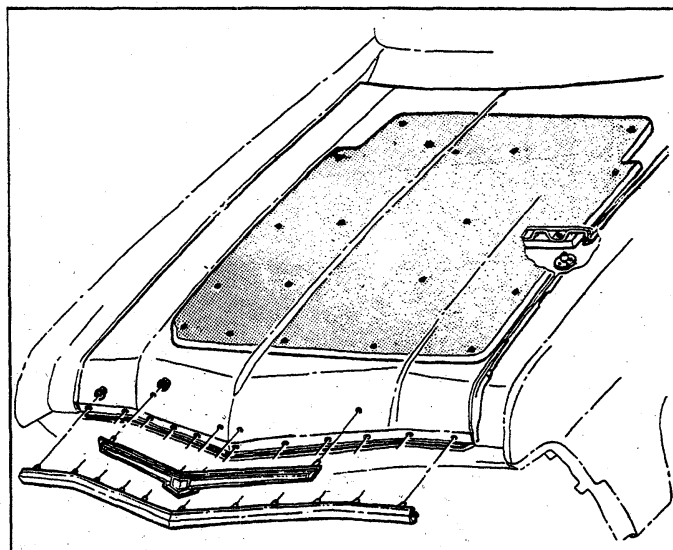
Hood, Insulator, and Molding - Chevrolet
